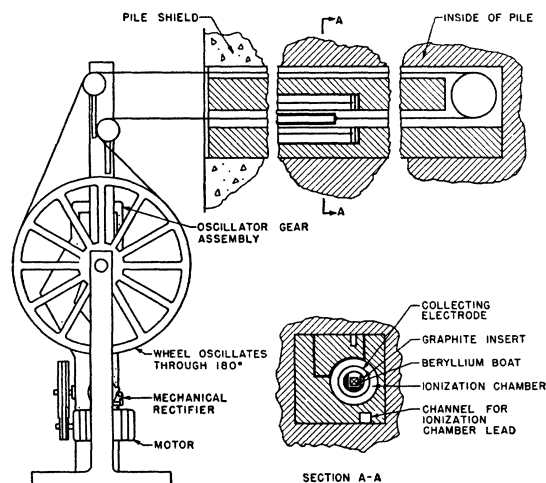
Pile oscillator mechanical assembly. The portion of the drawing showing the graphite channel and ionization chamber has been enlarged to show details.
